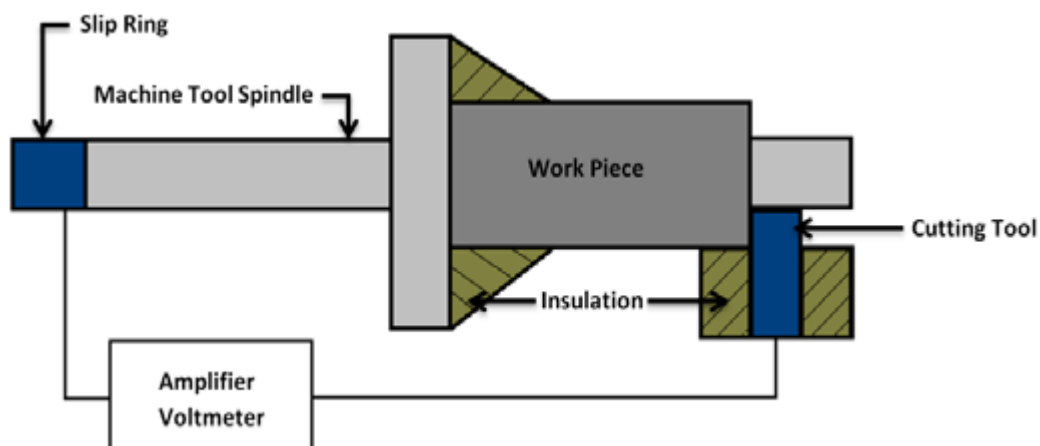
Schematic of a tool-workpiece thermocouple [35]
